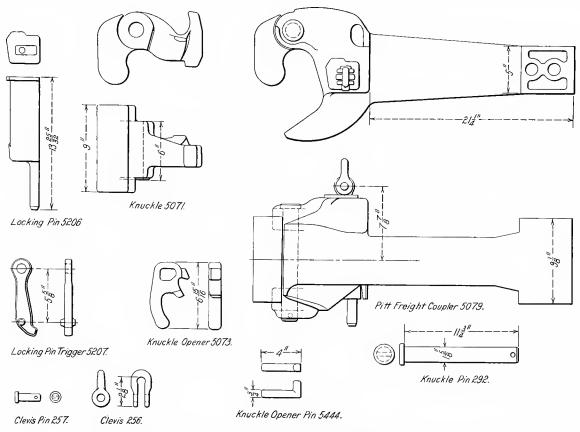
Pitt Freight Coupler and Parts. McConway & Torley Company.
